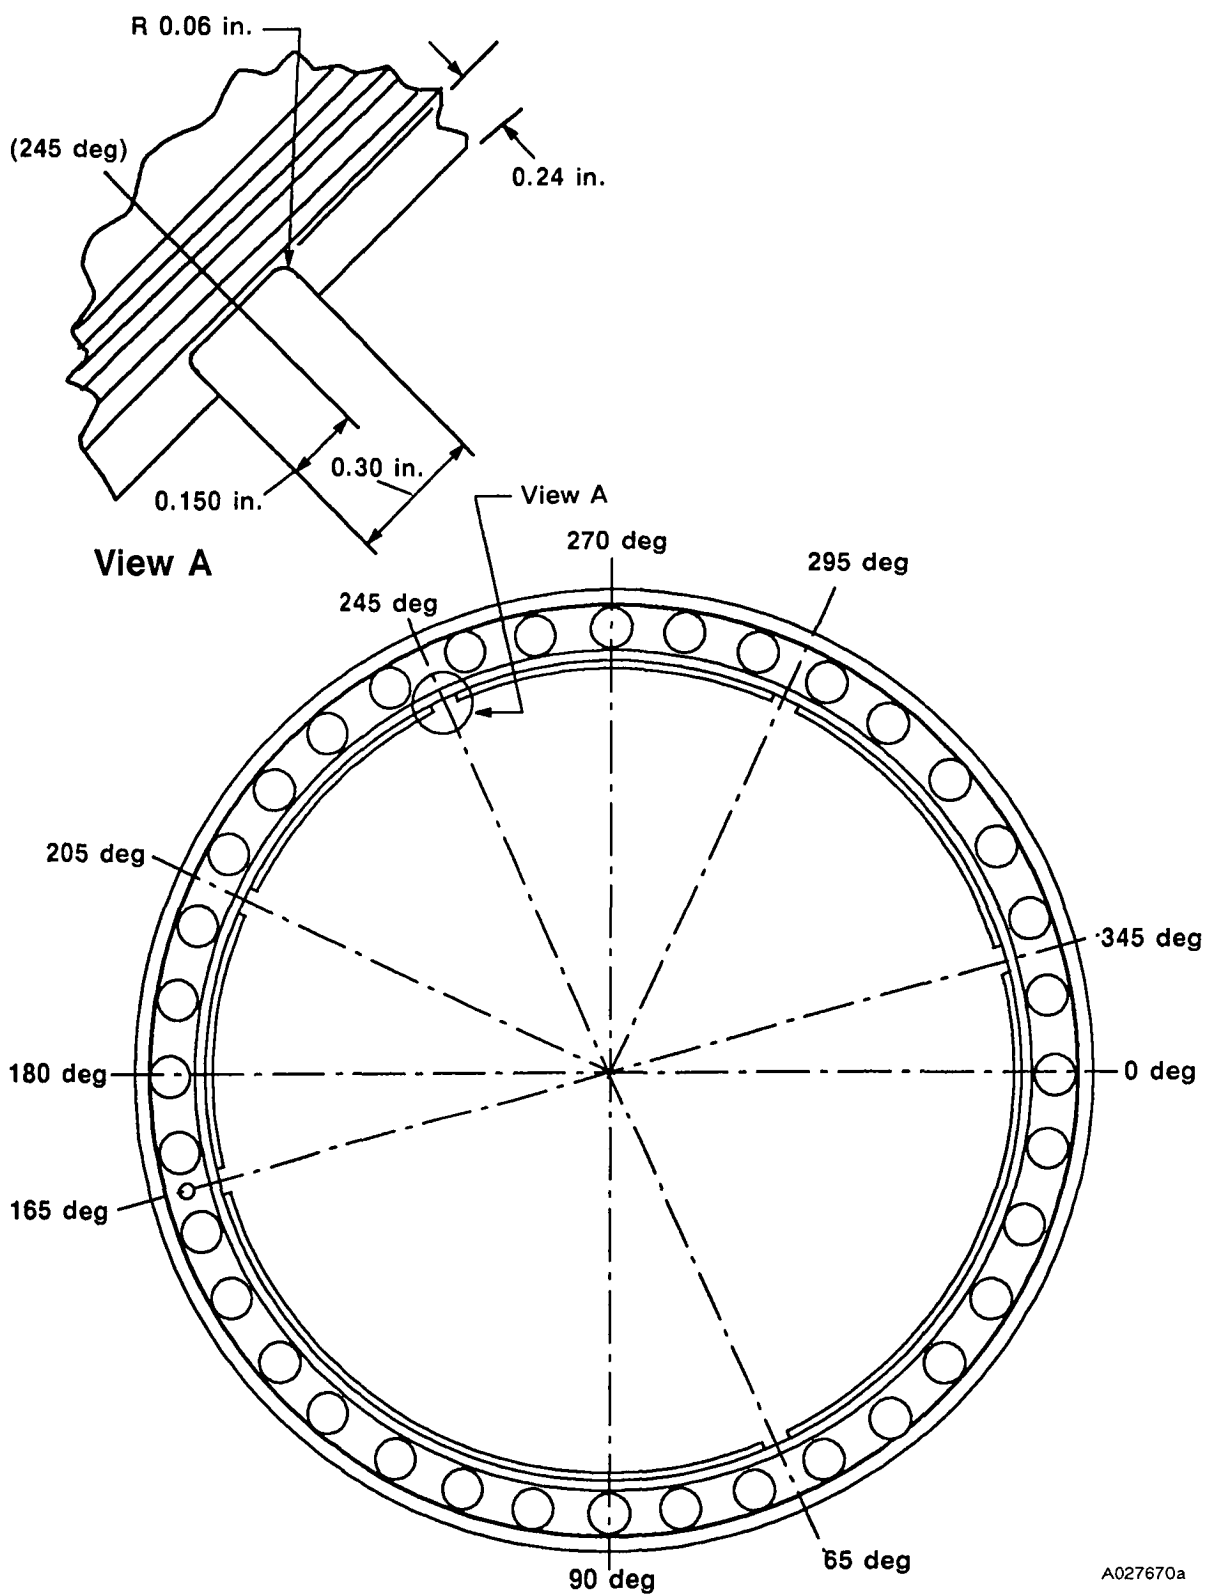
Modified Igniter Inner Gasket—Test No. 2
